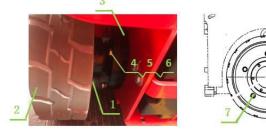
Rear Wheel Assembly (S2632 II, S2632E II, S46 II, S46E II, S4650 II, S4650E II)
